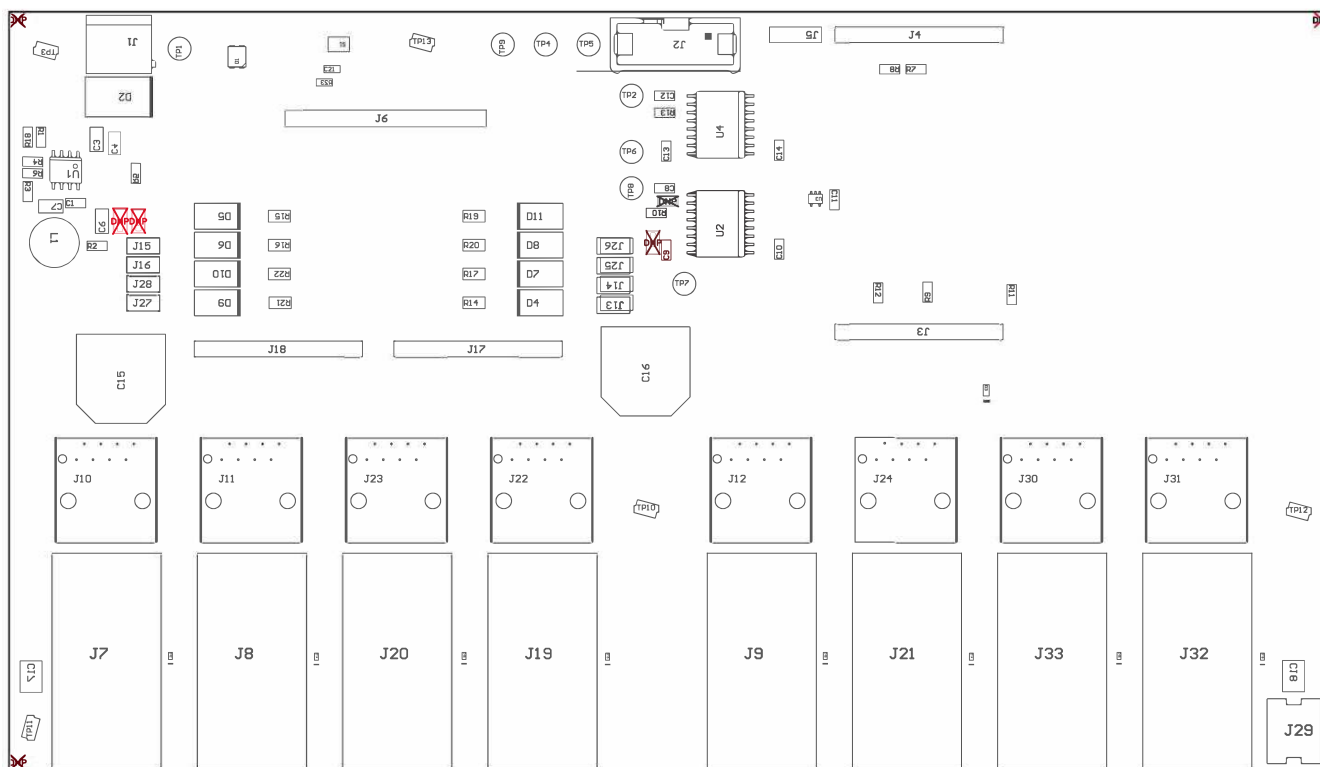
BOOST-PSEMTHR8-097 (Motherboard) Top Side Assembly
